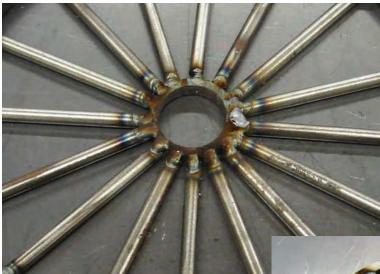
a) Bottom spokes welded to the inside ring on the top side.
